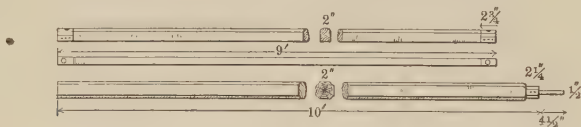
RIDGE AND POLE FOR WALL TENT.
